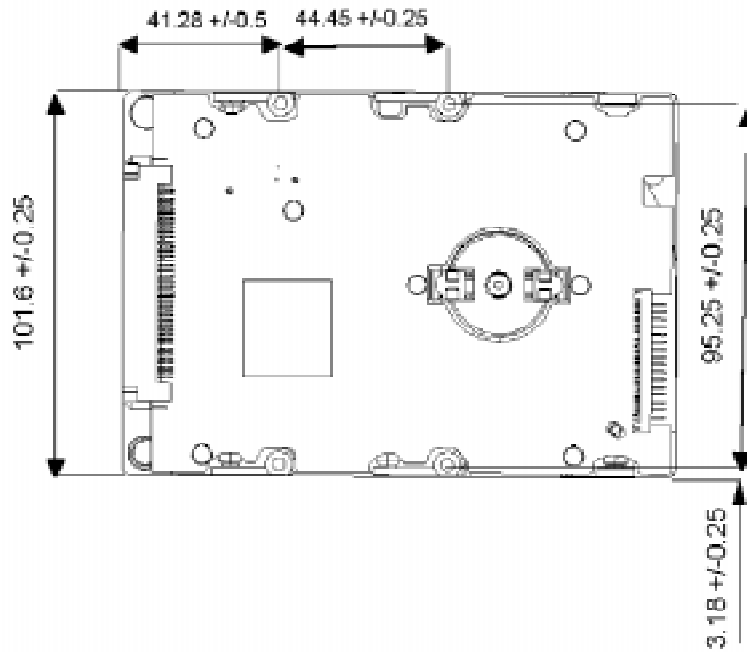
Location of bottom mounting holes (80 pin SCA SCSI version)
